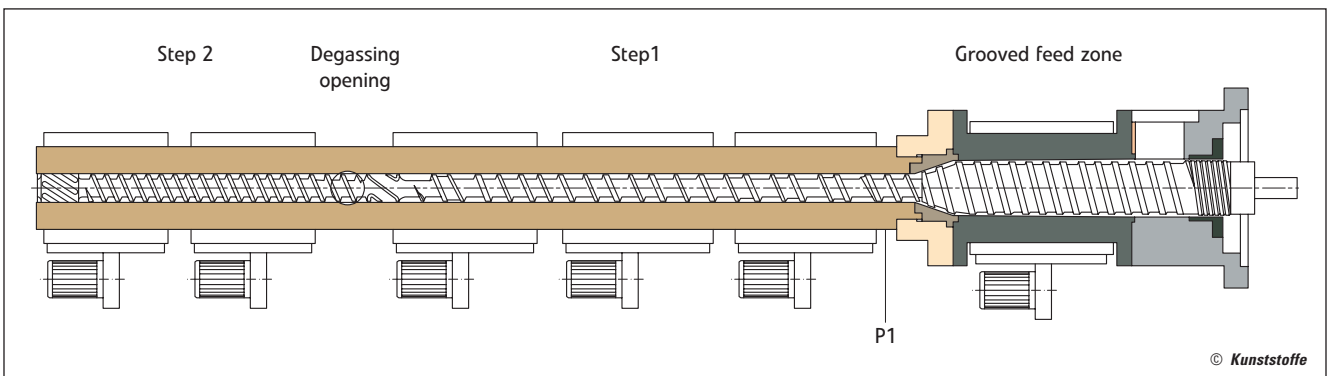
Degassing extrusion with a feed screw provided with an adjustable drive independent of the main screw
